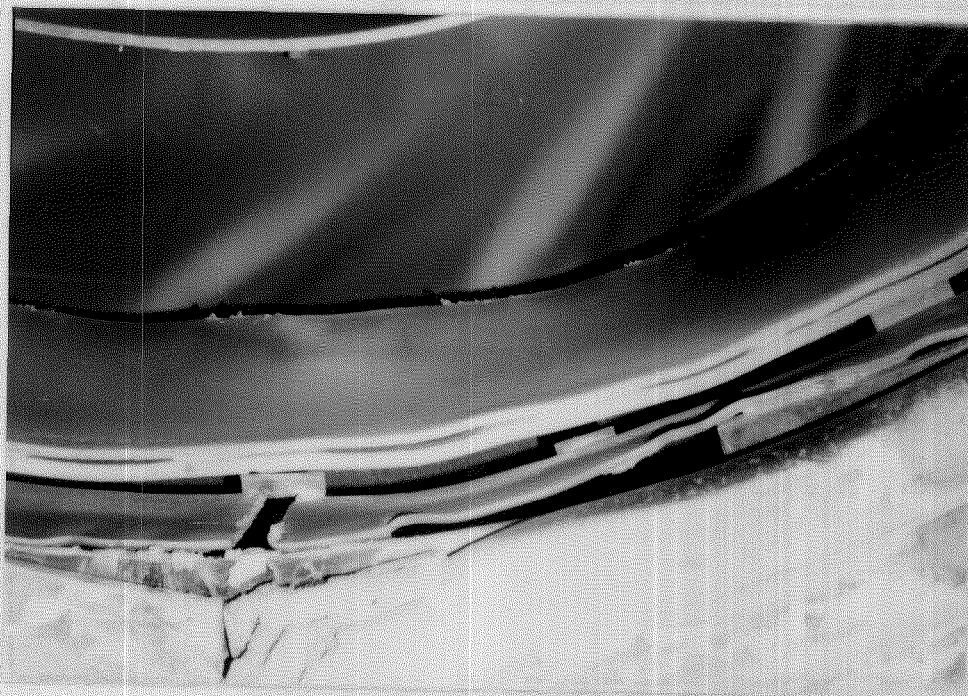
Additional photo of the burner fronts showing excessive clearances around the outside of the burner assemblies.
